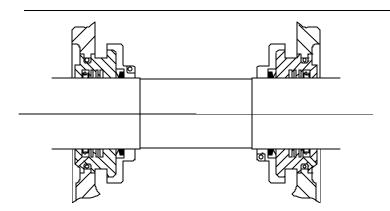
Mid-shaft seal arrangement, PB housings only.
